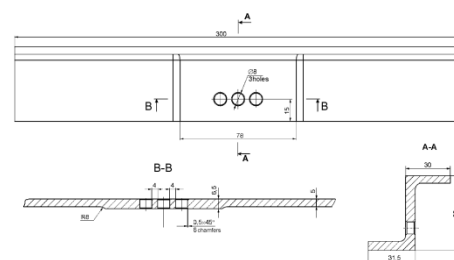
Stringer with Three Holes of  $\varnothing 8$  mm (Distance Between Center of Holes – 12 mm) Test-piece
